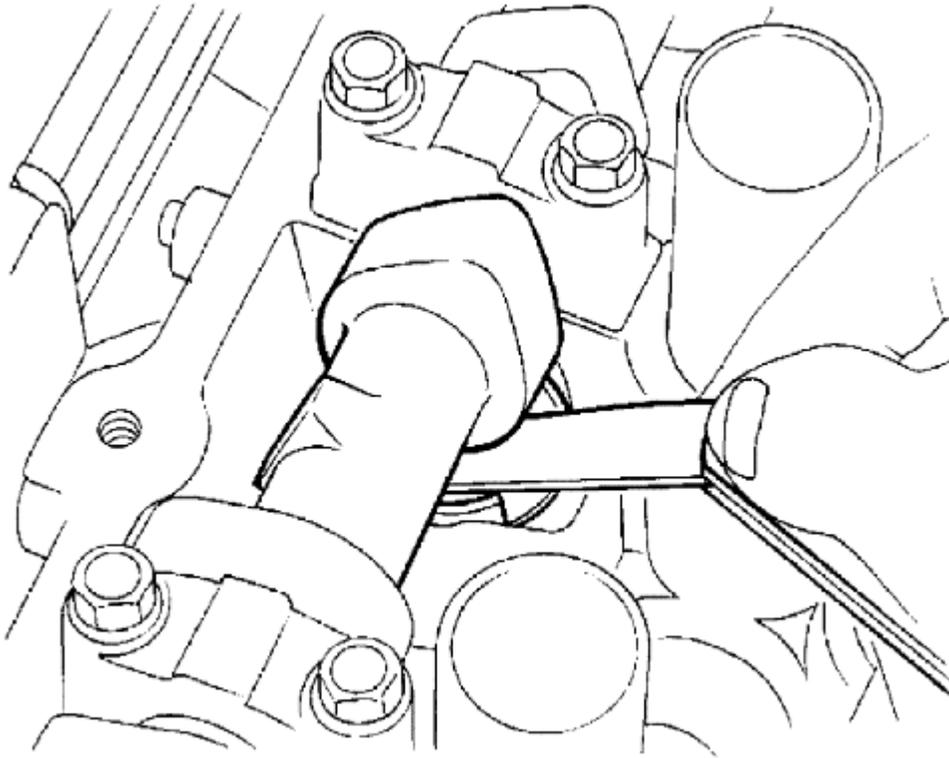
Measuring Clearance Between Valve Lifter And Camshaft
